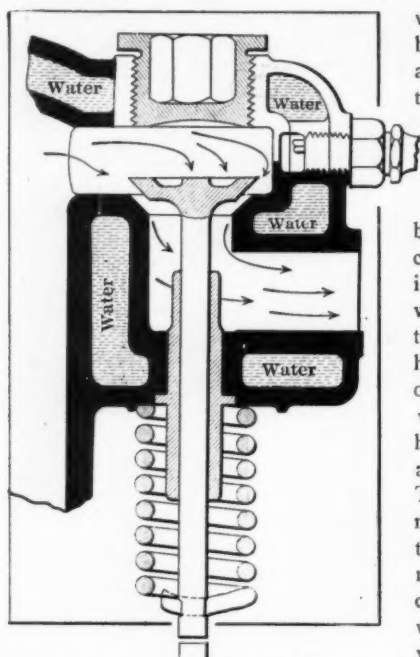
Proper design, showing water jacket all around the valve seat, so that the temperature is uniform.
